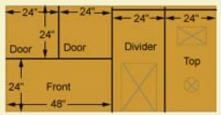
Cut sheet for second 4x8 3/4" plywood sheet.
